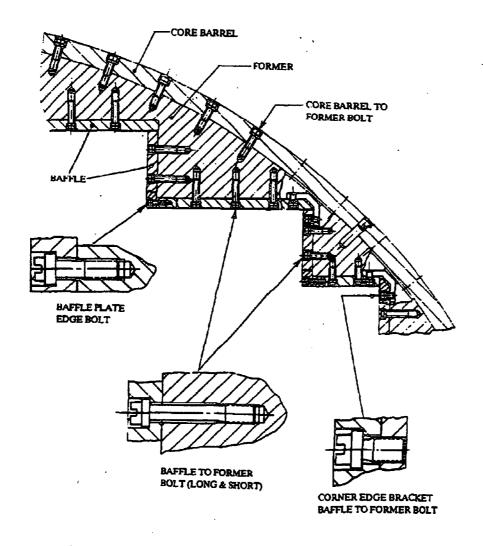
Bolting in a Typical Westinghouse Baffle-Former Structure
